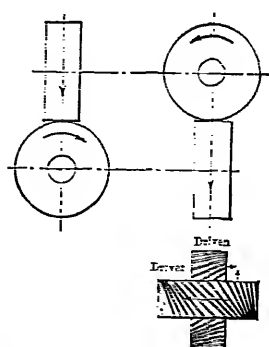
Left-hand spiral gears—counterclockwise rotation.
